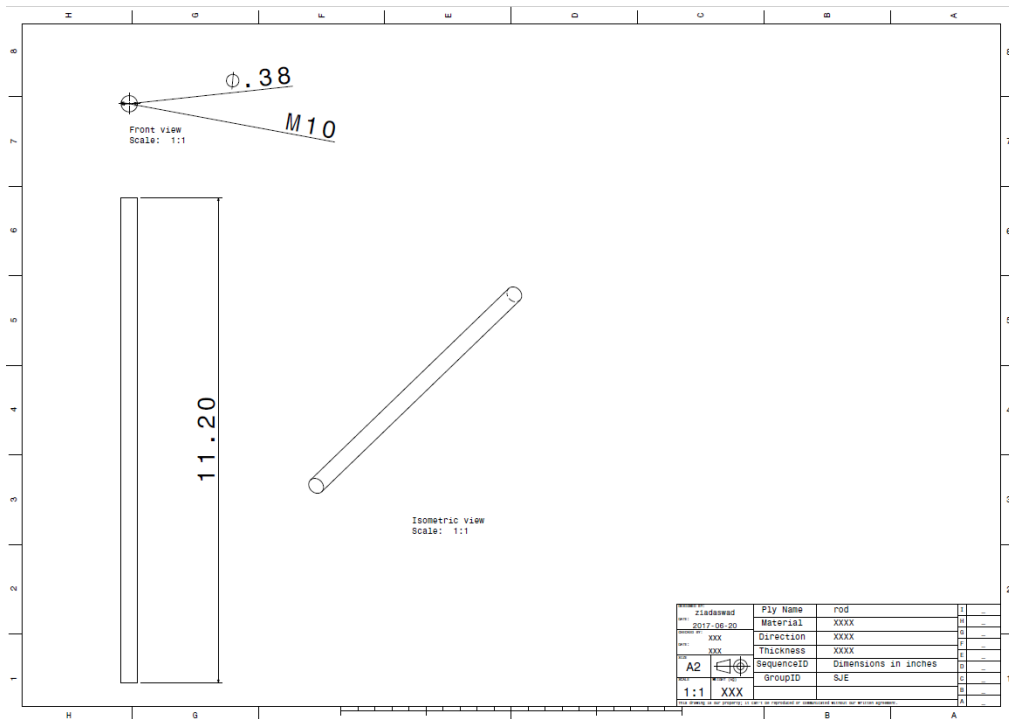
Rod (Connects between the Yoke and the Piston) CAD Drawing
